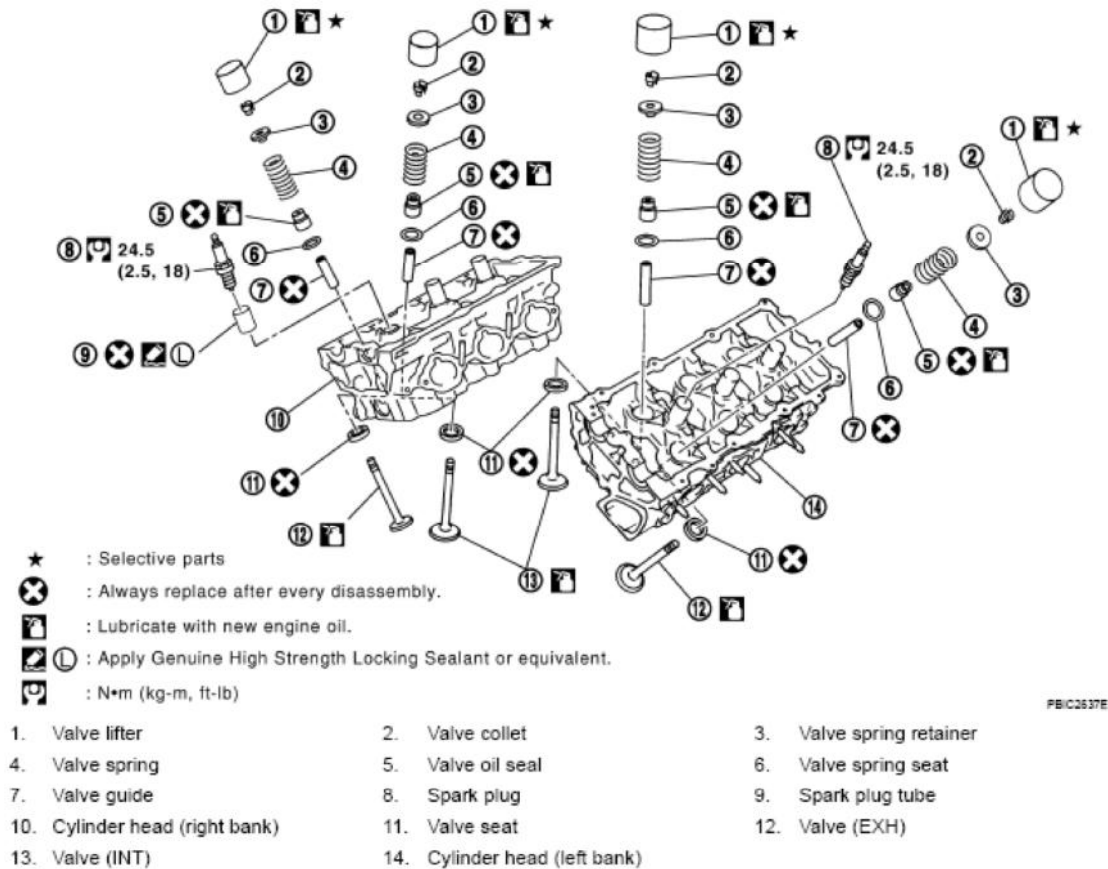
Identifying Exploded View Of Cylinder Head Components With Torque Specifications
